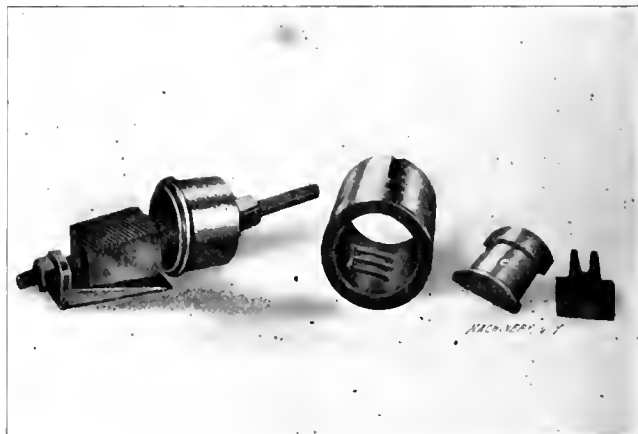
Main Valve Bushing with Tool and Guide for Facing Valve Seat
